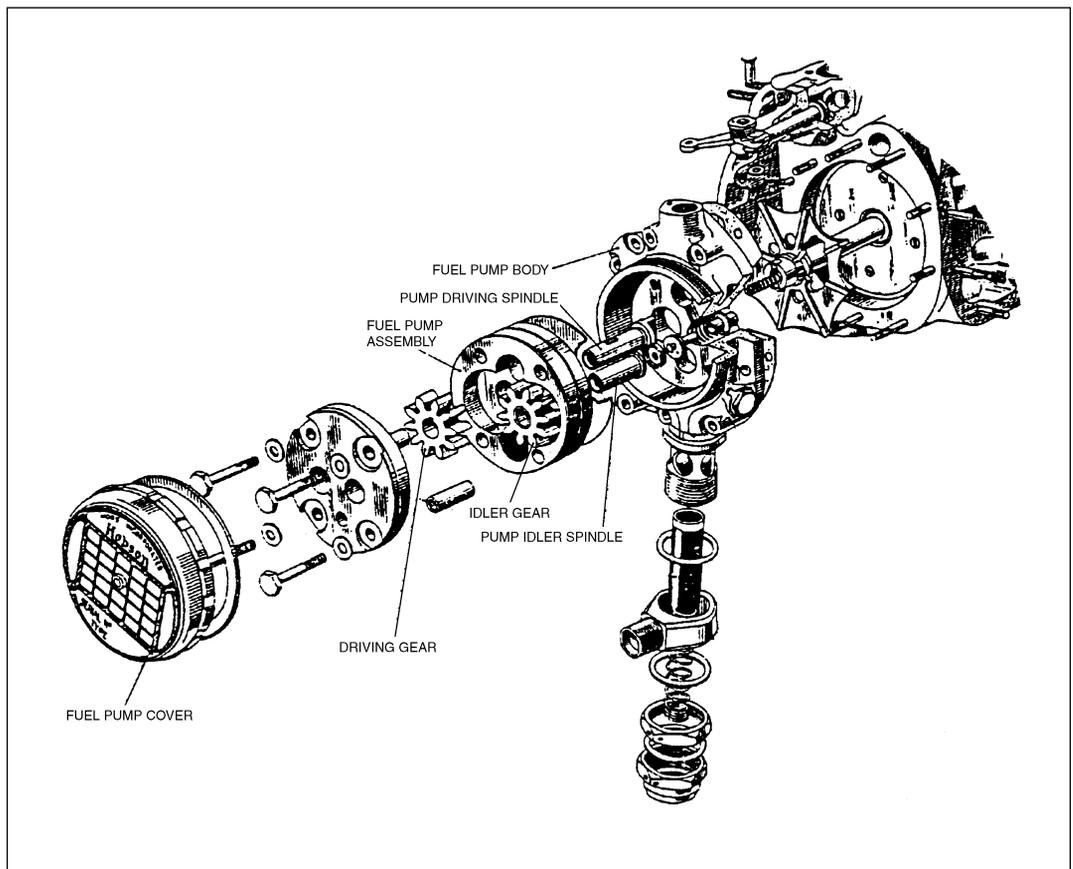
Schematic showing an exploded view of the fuel pump contained within the fuel control unit.
